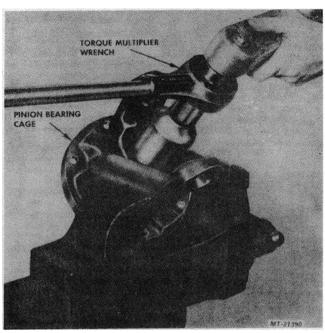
Removing Pinion End Nut (rear rear axle shown)
